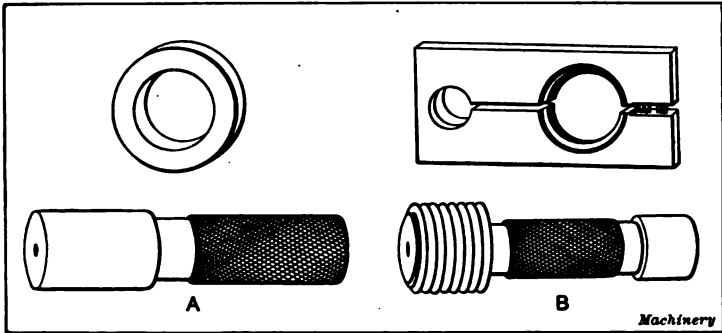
(A) Plug and Ring Gages (B) Internal and External Thread Gages
